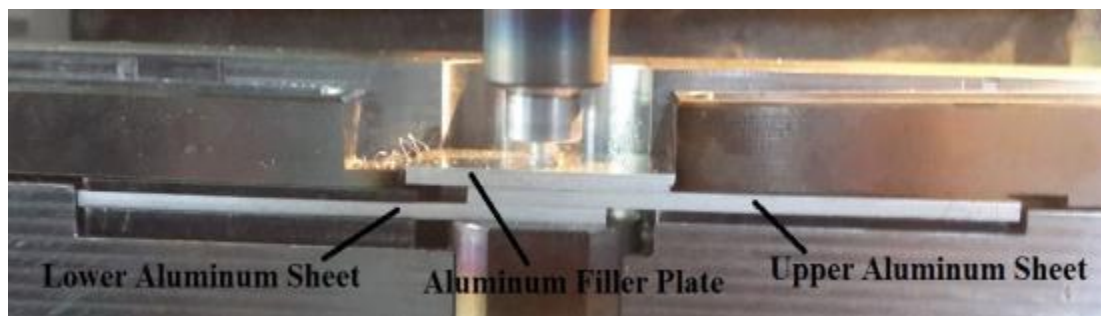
The position of aluminum sheets in the welding apparatus (Personal archive, 2017)
